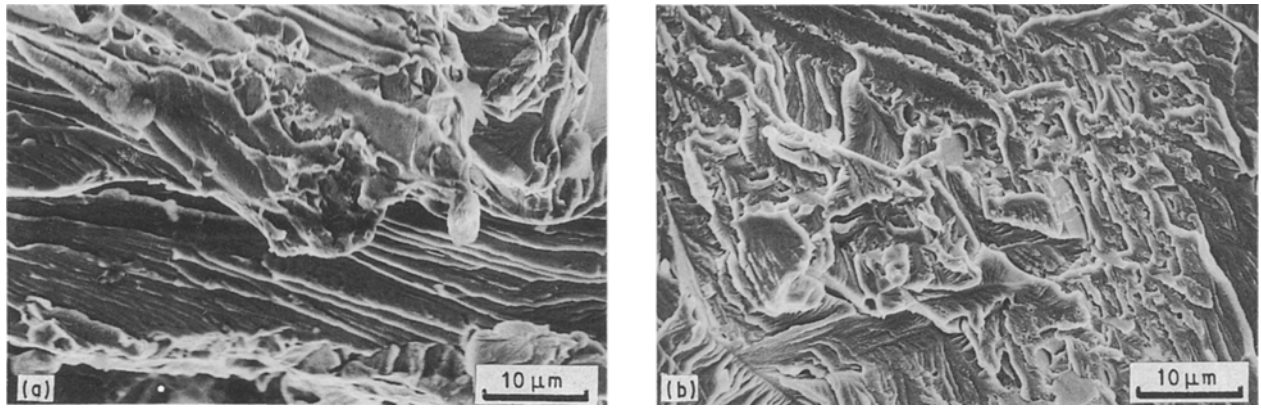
SEM photomicrographs of fractured tensile specimens from forged, rolled sheets show cleavage fracture (river pattern) in (a) boron-modified alloy and (b) mixed fracture (both dimples and river pattern) in (B + Ti)-modified alloy.
